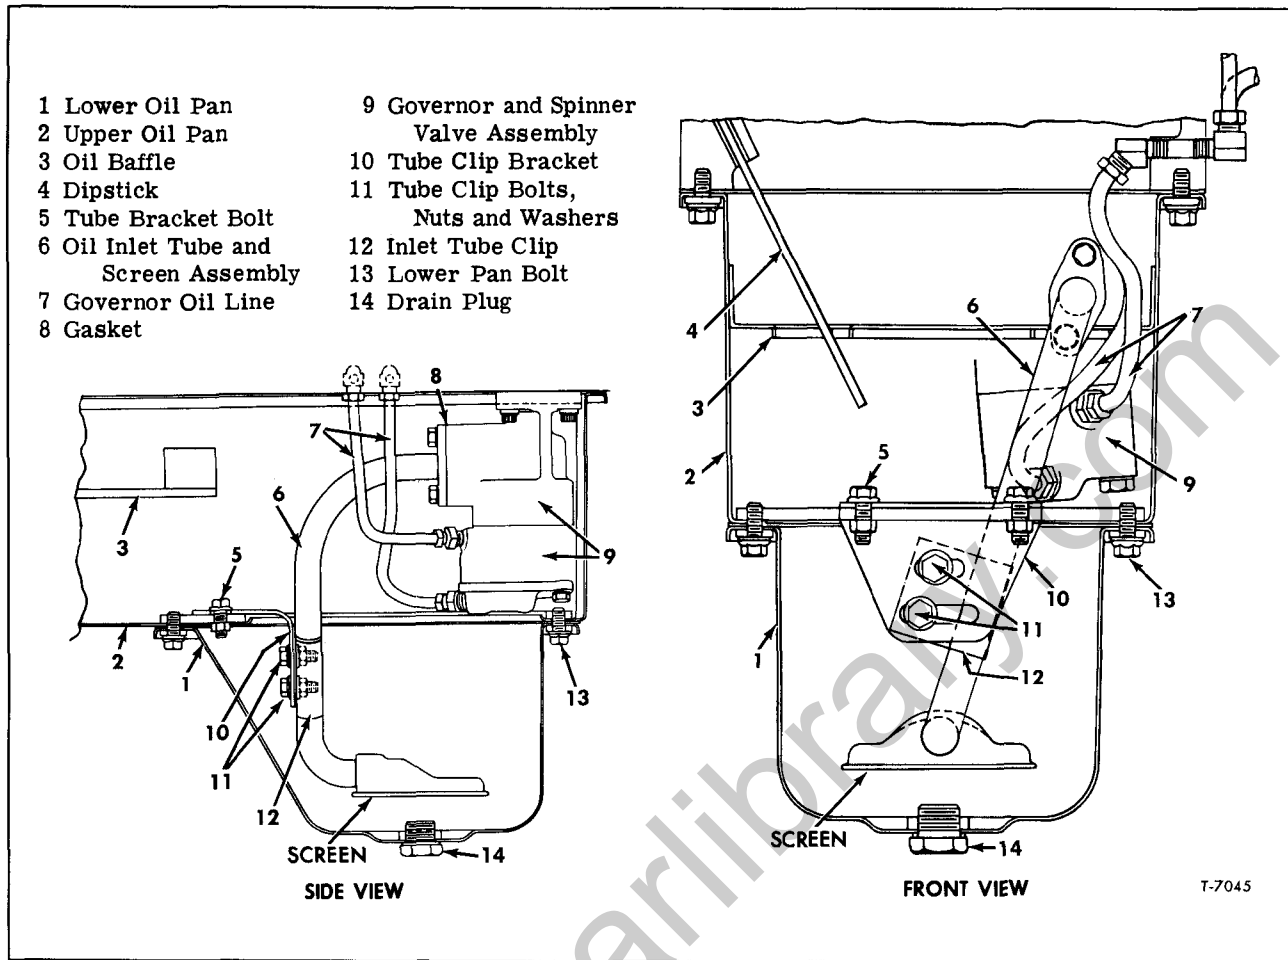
Oil Pan, Oil Pump, and Inlet Screen Installation (V8 Engine)
